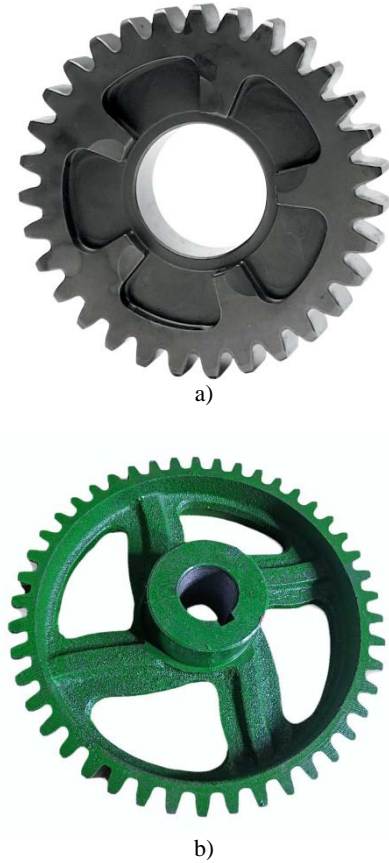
Different shapes of the gear wheel body a) forged gear wheel, b) casted gear wheel
